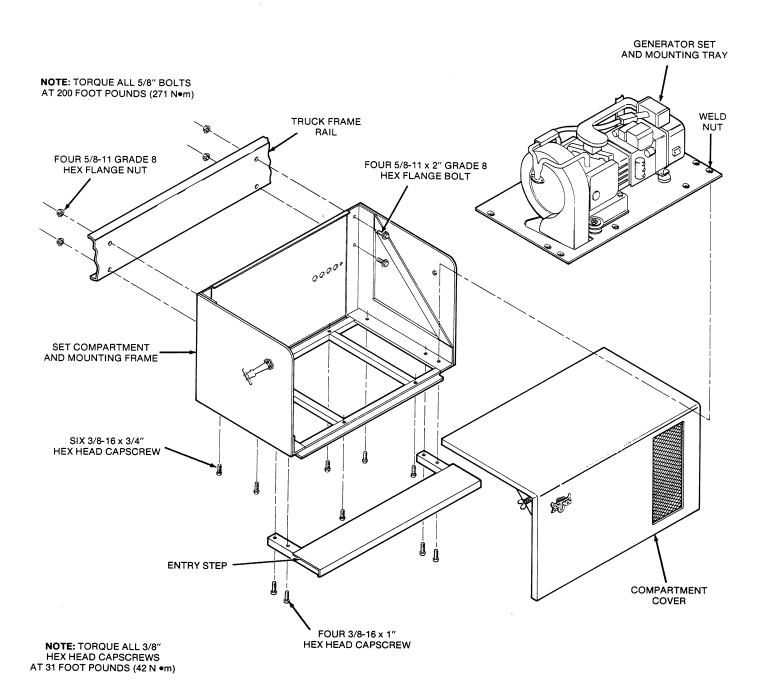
SIDE-MOUNTED GENERATOR SET AND COMPARTMENT ASSEMBLY
